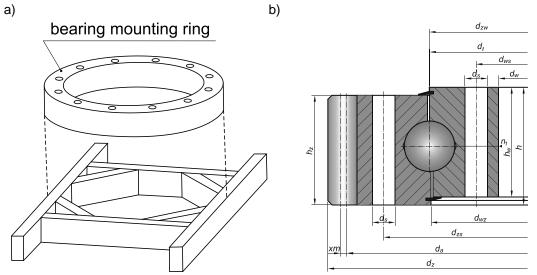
The design of the support subassembly (a) single row ball slewing bearing with four-point contact (b)
